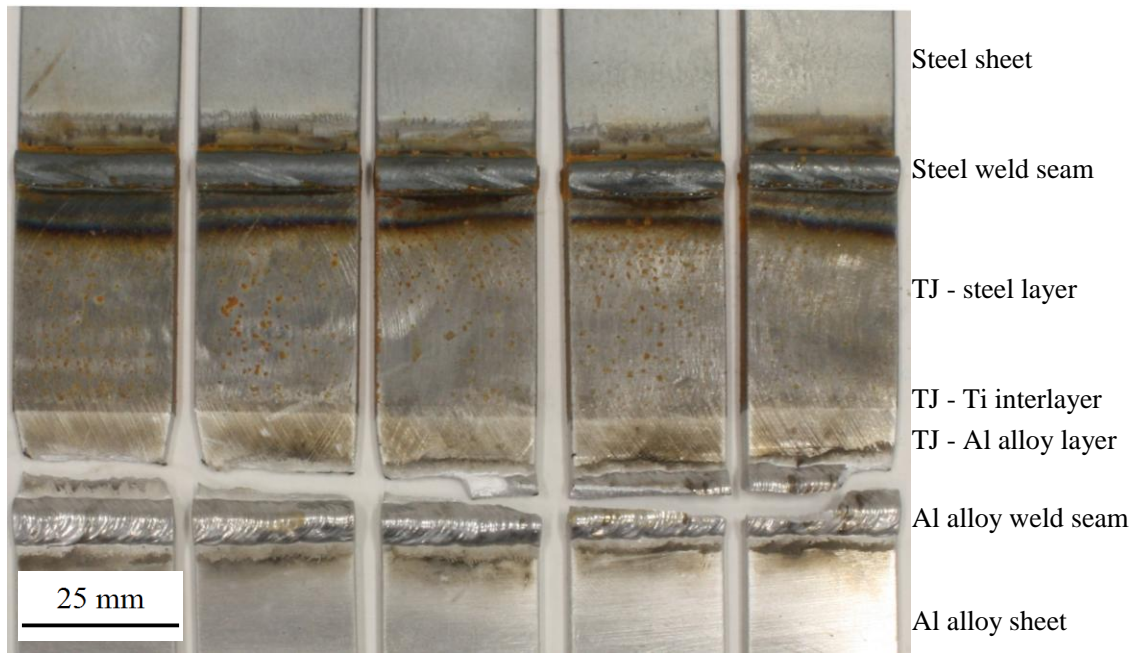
Type B hybrid joint specimens, after welding and tensile testing. TJ means Transition Joint.
